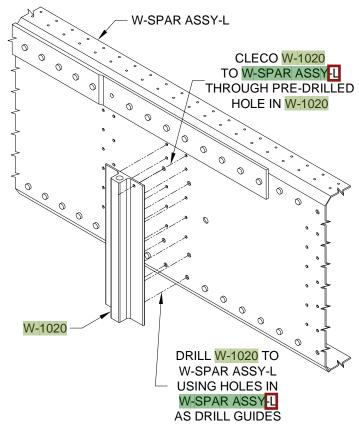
FITTING TIE DOWN BRACKET TO SPAR ASSEMBLY
